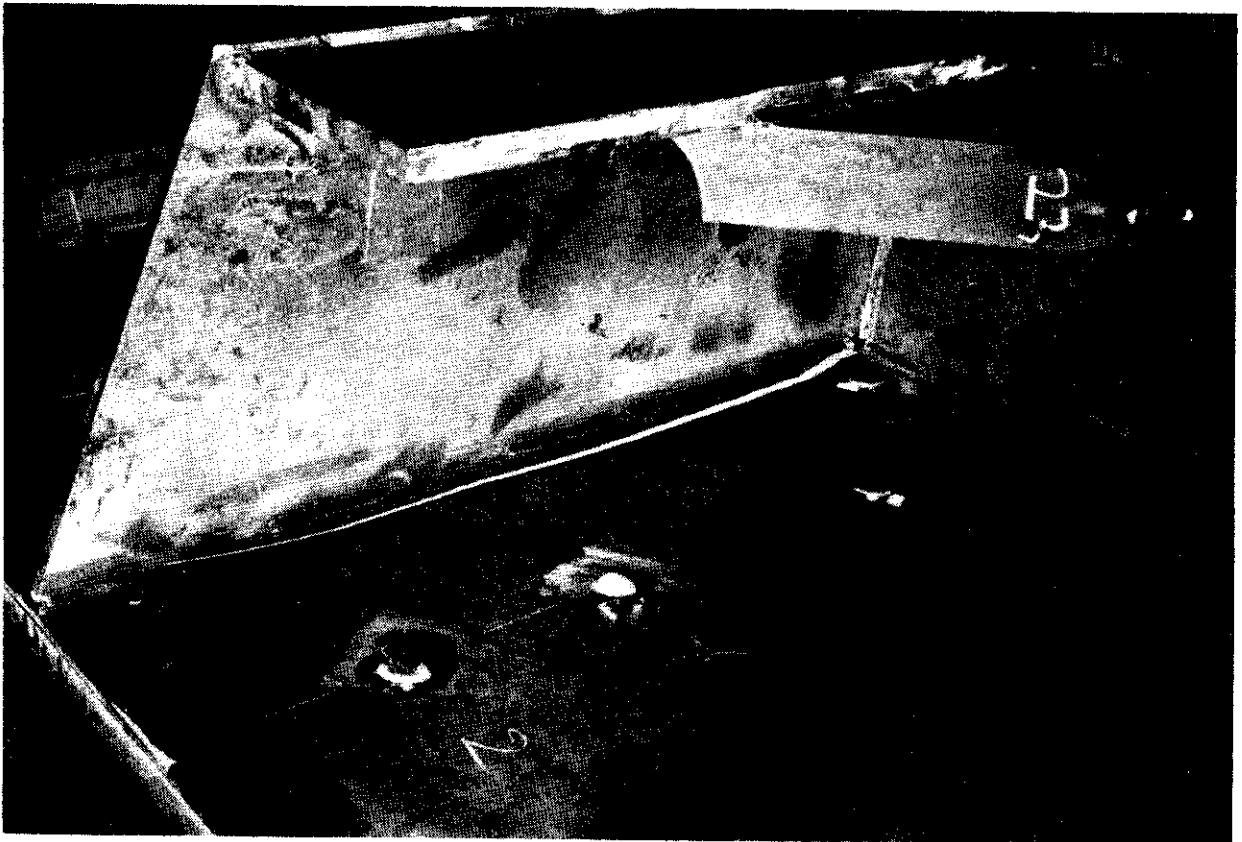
Specimen 38: View of fracture from below deck, outboard and forward of hatch end beam
